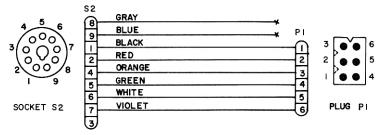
Console Connector Extension (Plug and Socket Shown from Wire End)
